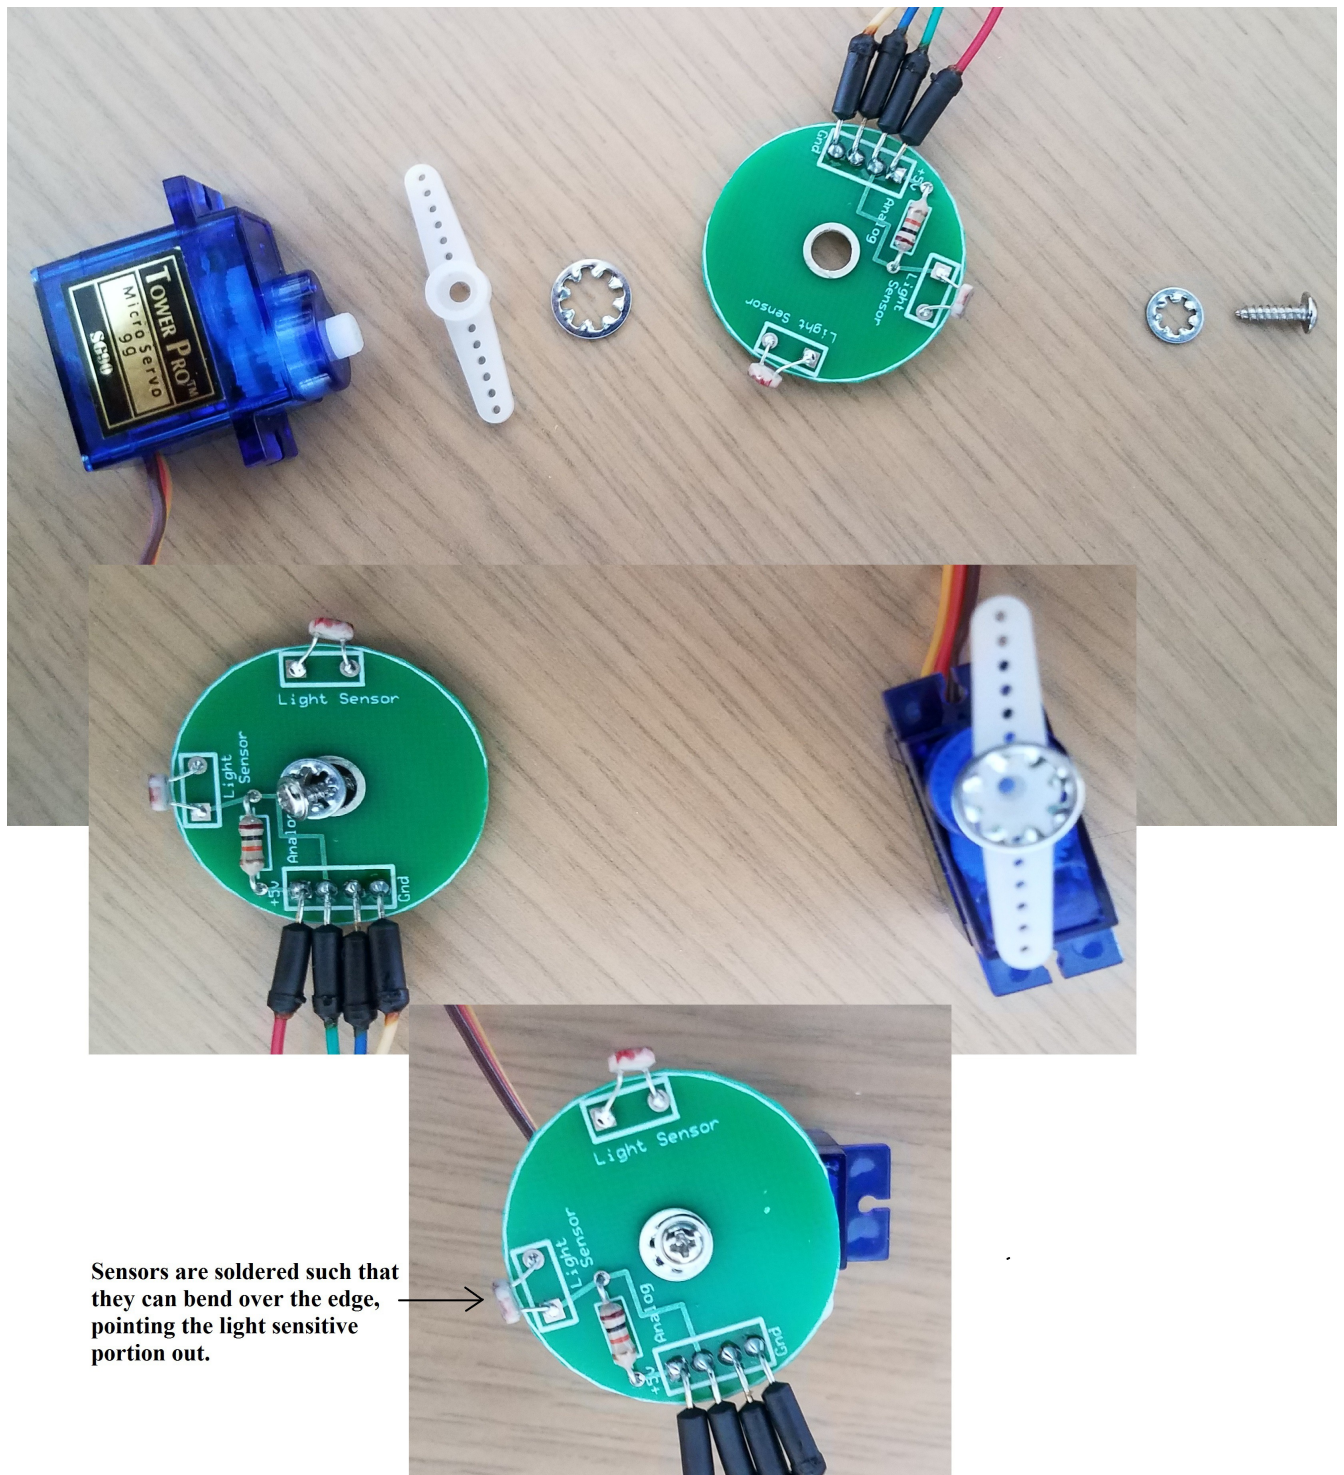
B. Mounting of Light Sensors and Board to Motor
